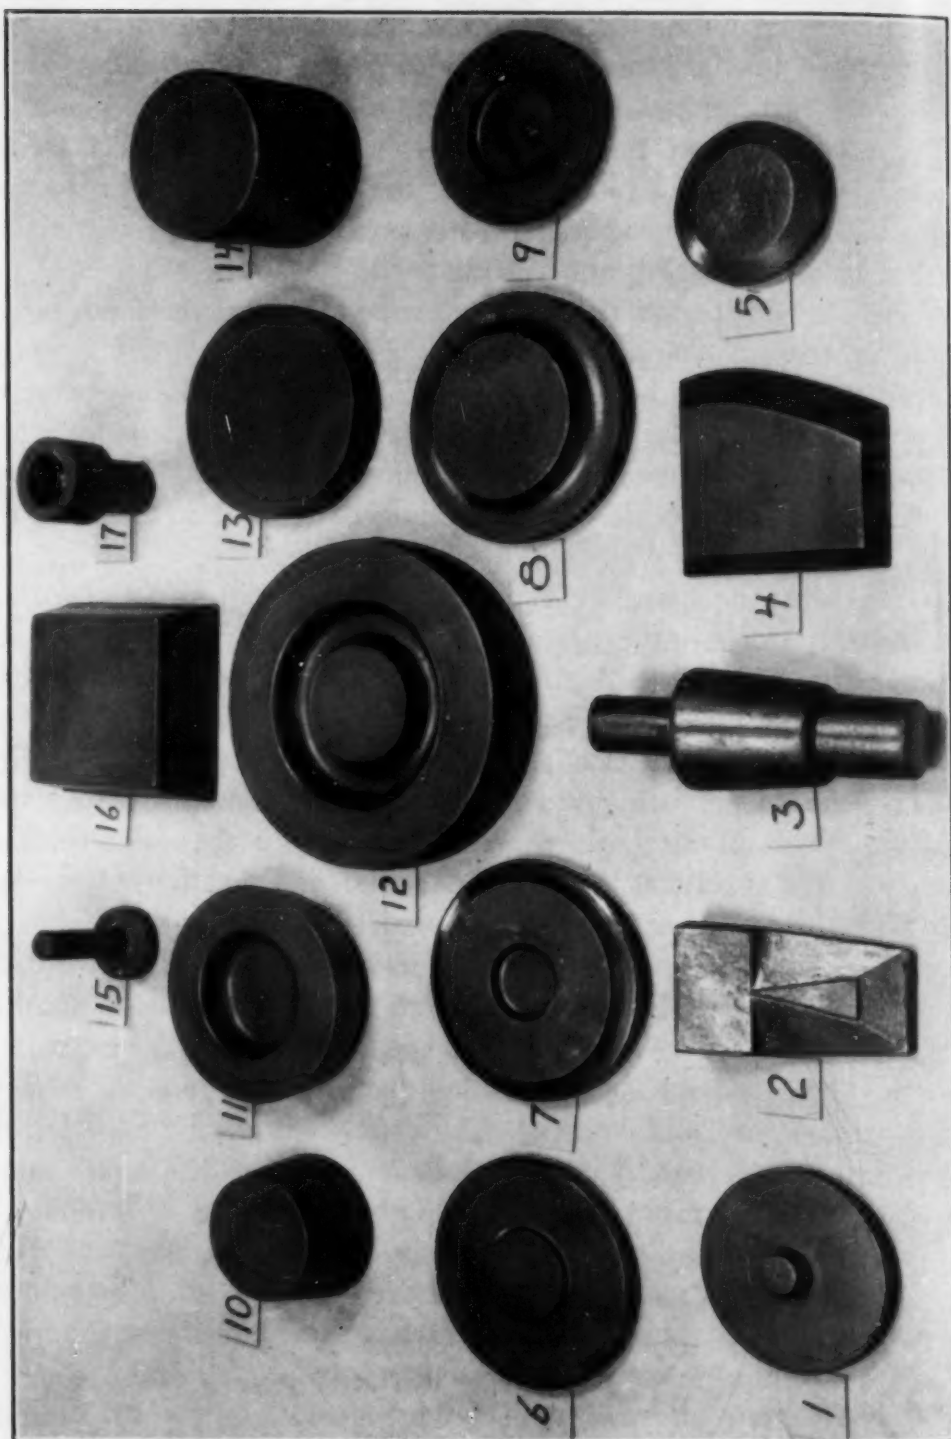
Group of Typical High Speed Steel Forgings from which the following are made: 1. Meat Cutter Plate, 2. Sugar Cane Shredder Knife, 3. Plunger for Molding Glass Insulator, 4. Wood Heel Knife, 5. Involute Gear Milling Cutter, 6. Slitting Cutter, 7. Involute Gear Milling Cutter, 8. Blanking Die, 9. Gear Shaper Cutter, 10. Tire Turning Tool Insert, 11. Gear Shaper Cutter, 12. Recessed Milling Cutter, 13. Plain "Pancake" Forged Disk, 14. Hob, 15. Woodruff Keyway Cutter, 16. Tire Turning Tool, 17. Gear Tooth Chamfering Cutter.
